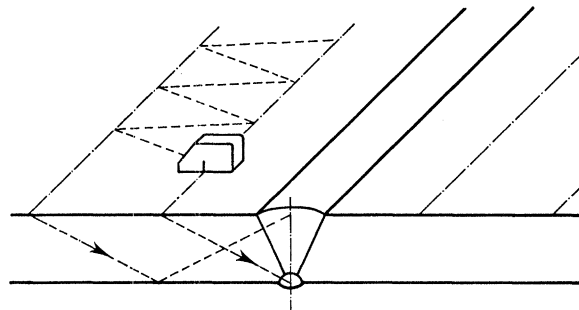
Zig-zag pattern to be followed by a manual scan to reveal weld flaws: close to weld for detection of root defects; away from weld for examination of upper zone; intermediate positions to cover entire weld height.
